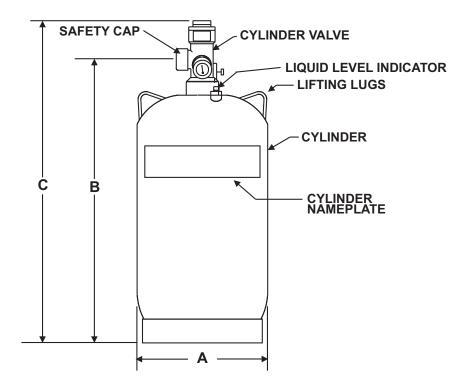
Typical Cylinder Assembly, 125 to 350 lb.
